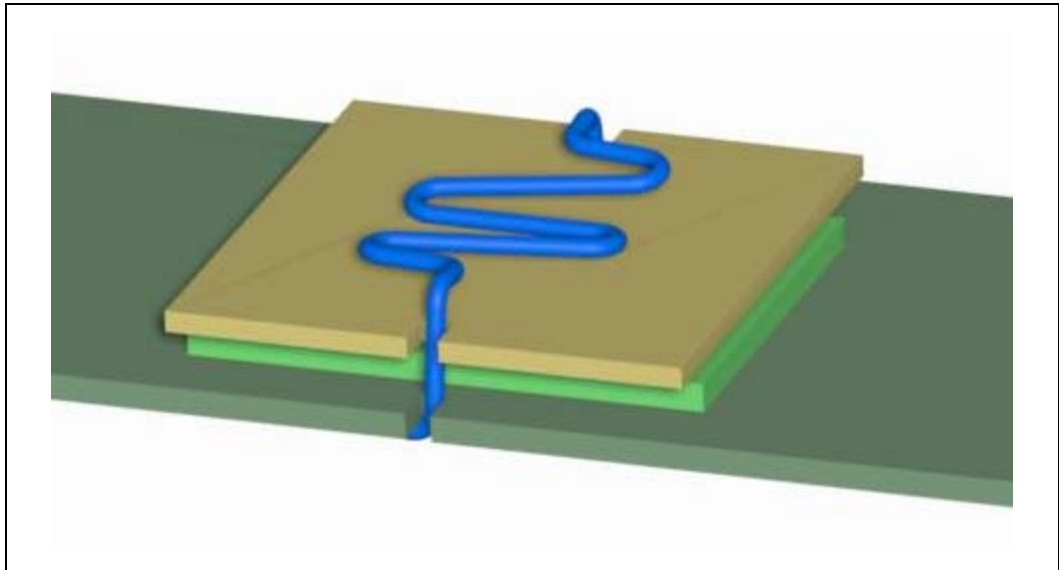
Wire Clip Heatspreader Board Component Keepout
